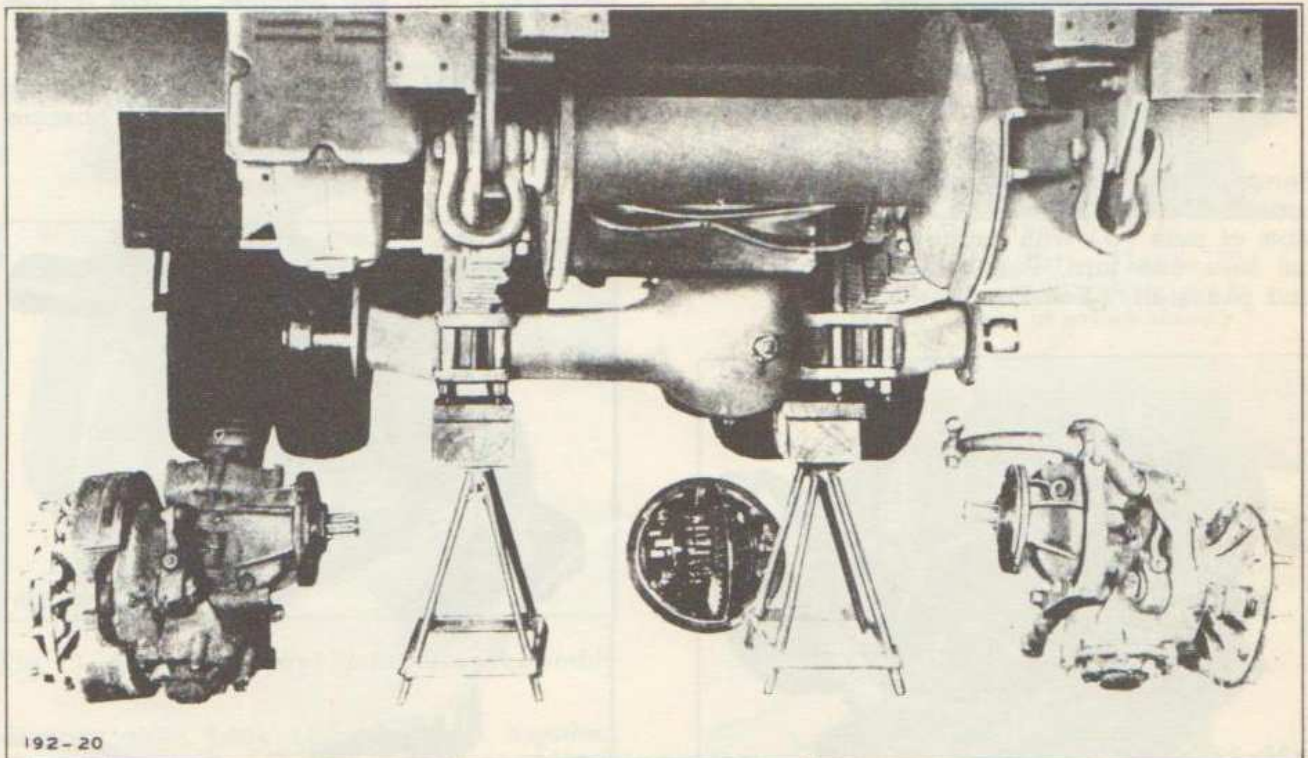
Axle Drive Unit and Both Wheel Drive Units Removed
